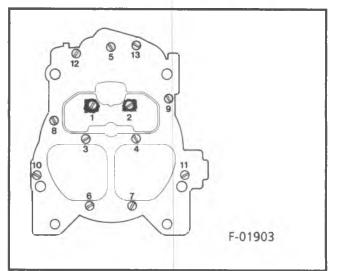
Air Horn Screw Location and Tightening Sequence
